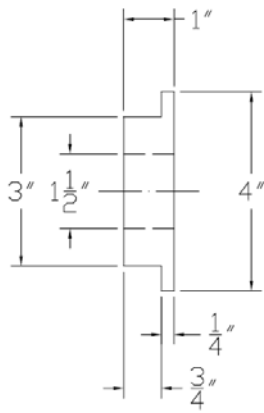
Big Insert for 5/8" and 3/4" Bolts
